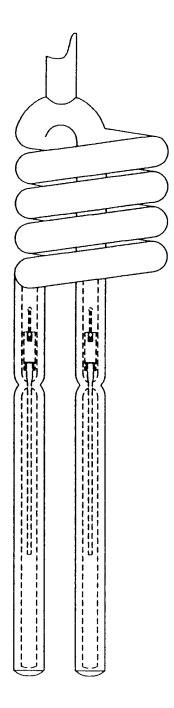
Electrodes Vacuum Sealed into Coil Blank
